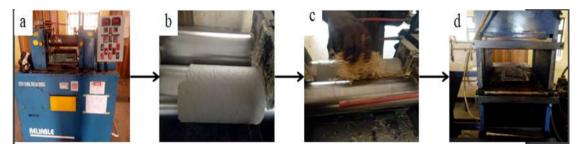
Composite production process; a) Two roll mill machine b) PET compounding c) Mixing PET with Bamboo fibre d) Compression Moulding Machine
